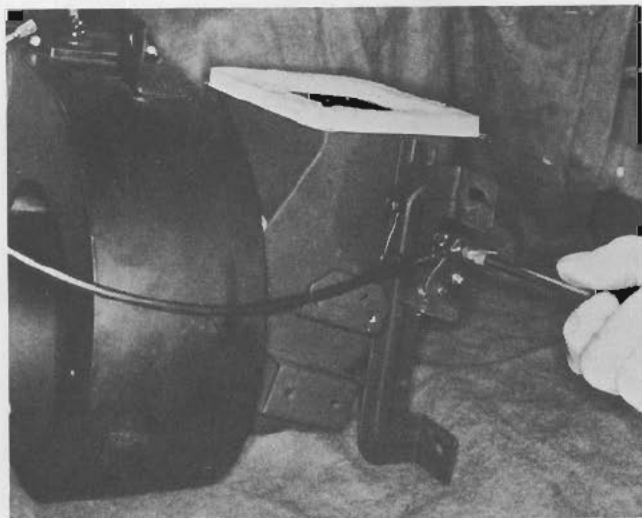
Air Intake/Blower Assembly Cable Disconnect
